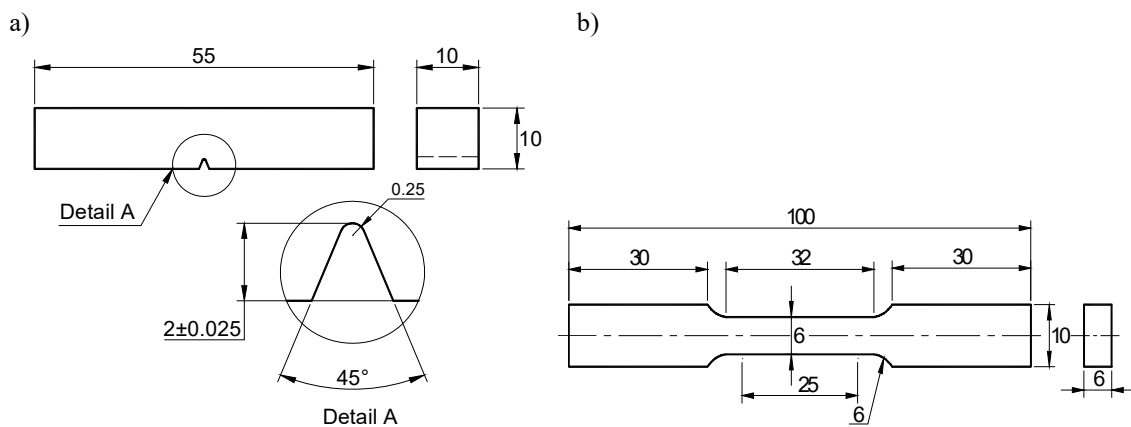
a) Schematic of the impact test sample and b) the tensile test sample
